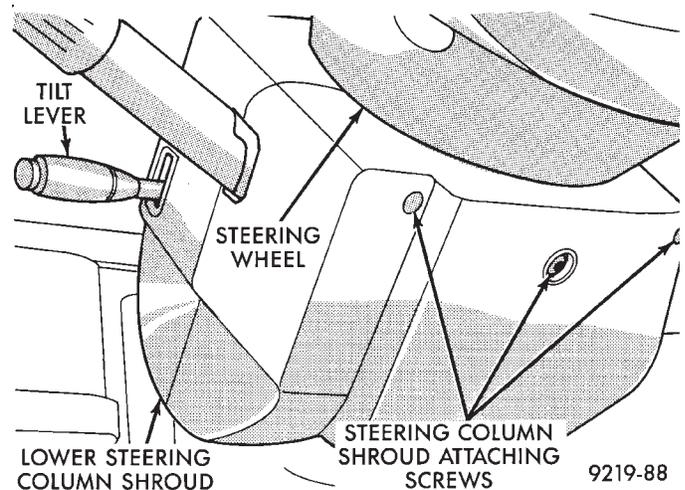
Upper Steering Column Shroud And Tilt Lever
